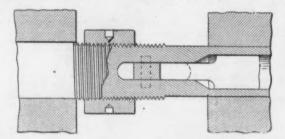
Detail of a Drill Socket Showing Manner of Adjusting the Drill Longitudinally.
